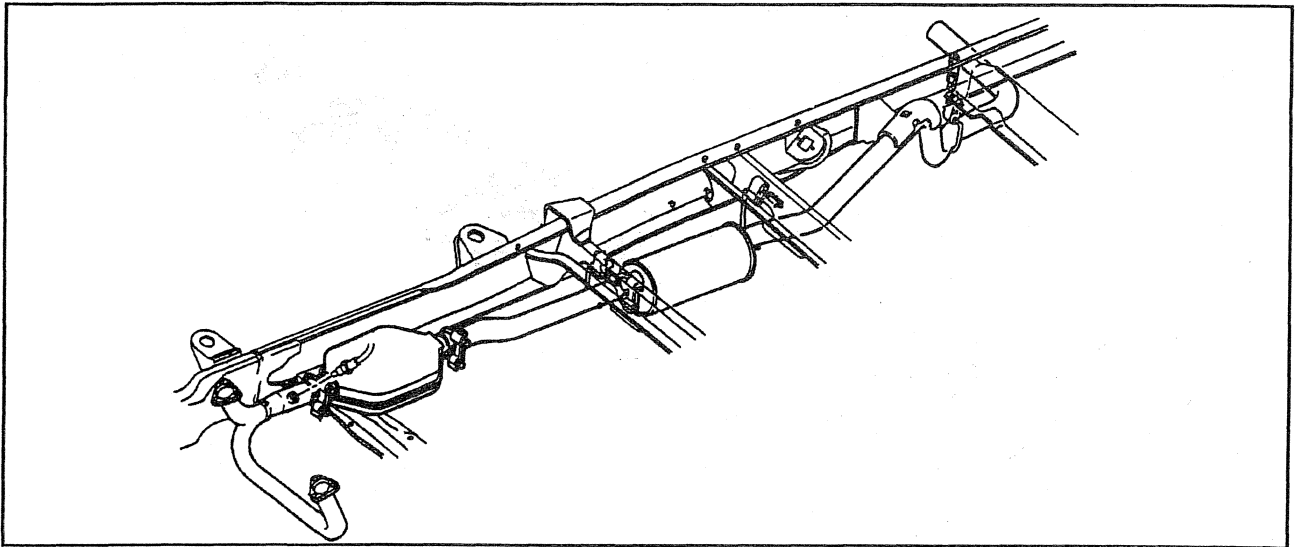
Exhaust System - C/K Cab Chassis (Model 310 w/L05 below 15,000 GVW)
